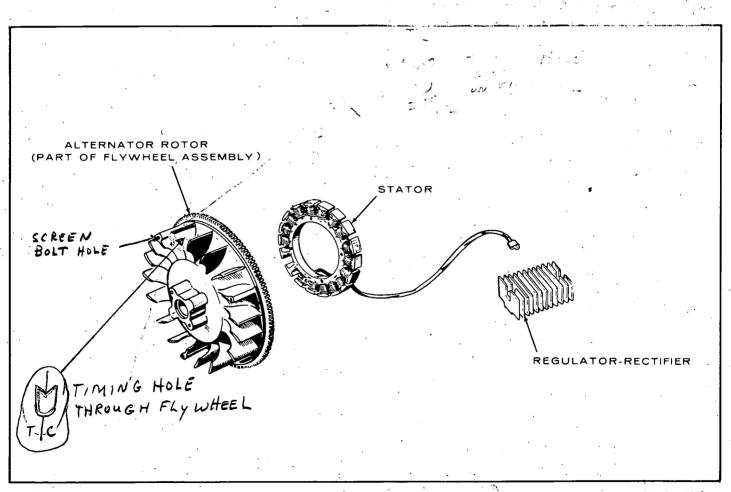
FLYWHEEL ALTERNATOR AND ENGINE TIMING VIEW
